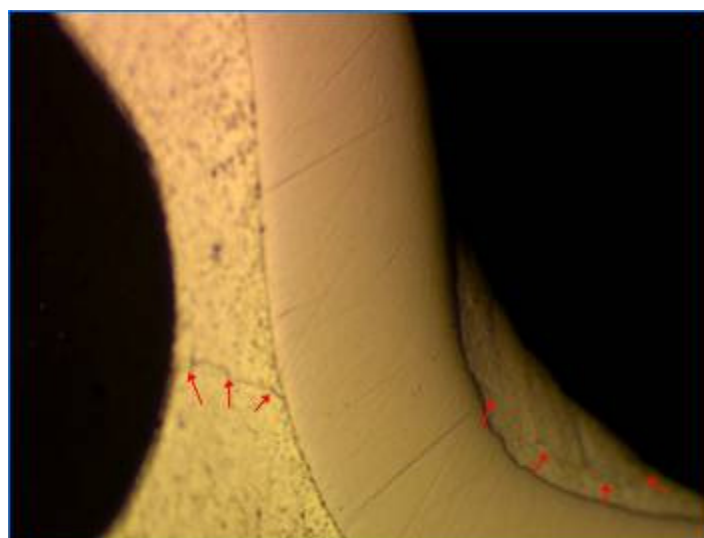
cross section, SN63, U16, right lead solder crack, 200x
